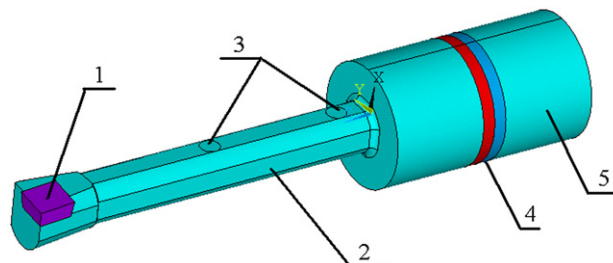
Finite element model of vibration turning tool: 1—tool insert, 2—concentrator of mechanical vibrations (horn), 3—areas of tool fixing in a lathe, 4—piezoelectric transducer (piezoceramic rings) and 5—backing.
